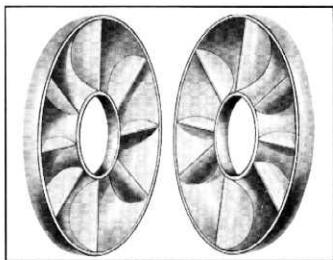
Coupling (Doughnut Shaped with Vanes)
